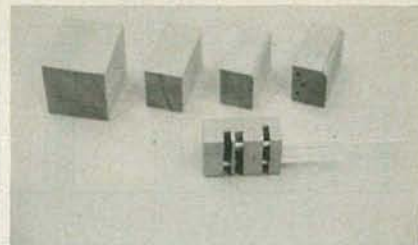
A COMPLETED BEARING BLOCK with shafts and gears is shown in the foreground. The background shows the progression of fabrication steps.
